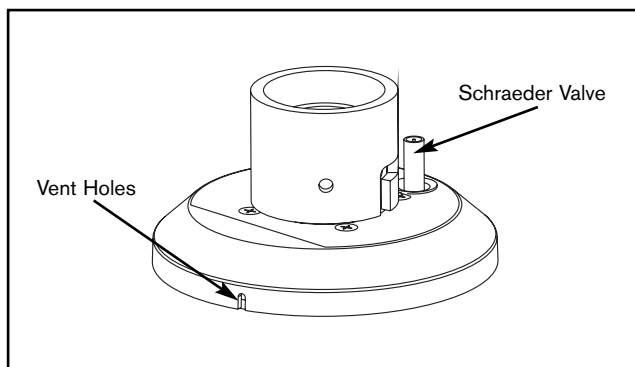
Pressure Housing, Showing the Vent Holes and Schraeder Valve
